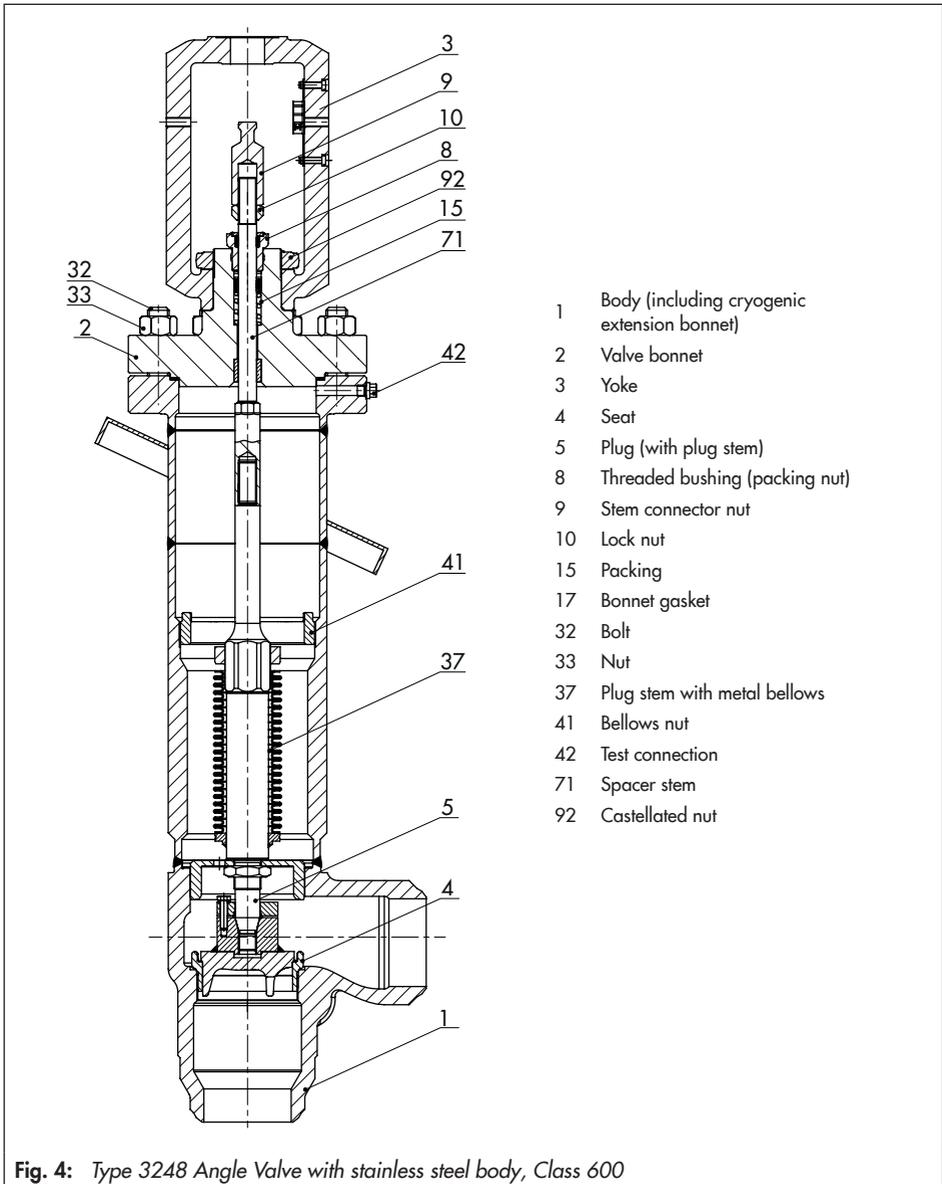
Type 3248 Angle Valve with stainless steel body, Class 600
